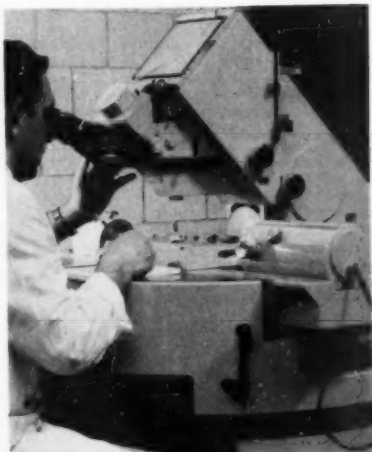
The Zeiss Universal Measuring Microscope is considered most versatile gage in the Timken Company's Gage Laboratory. The machine is used primarily for checking accuracy of tool profile gages necessary for grinding of forming tools used on automatic screw machines.
